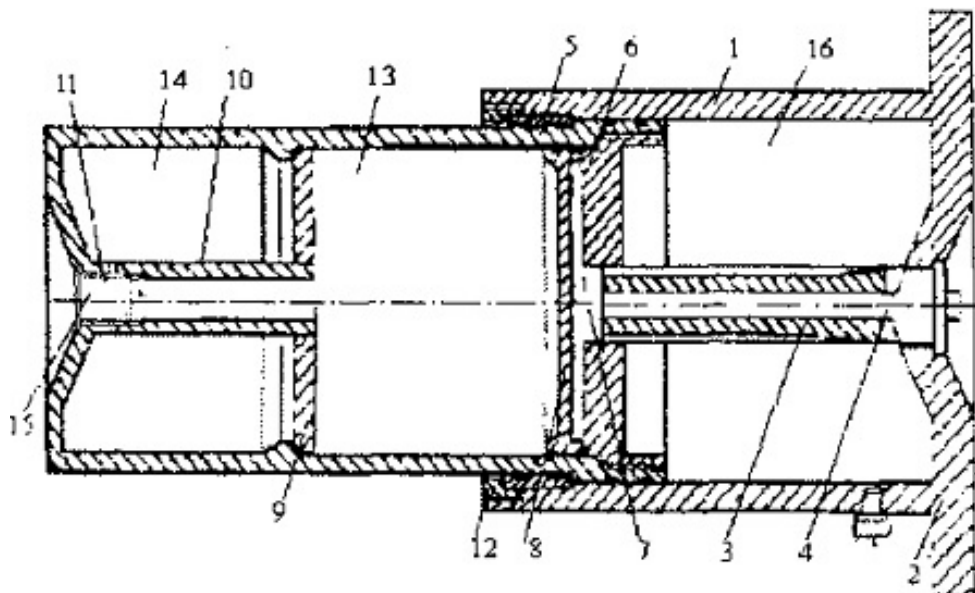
Section of a draft gear with the variable gas quantity in the working chamber
